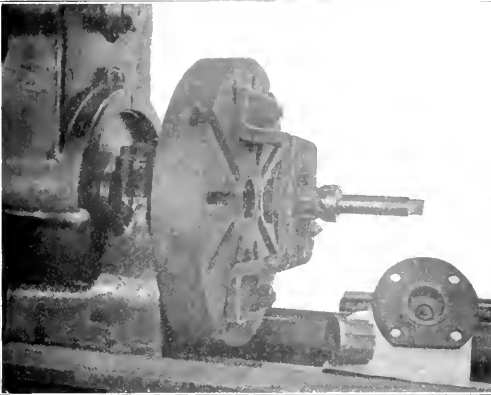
Finishing Air Pump Valve Chamber Head for Bushing
